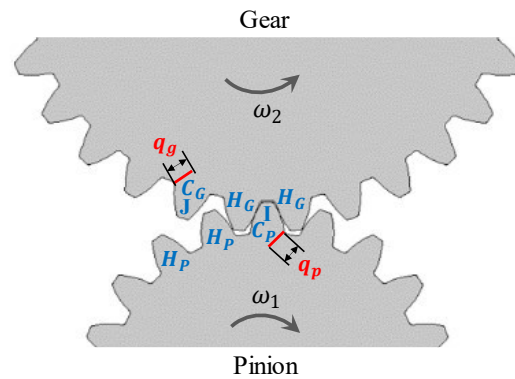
One tooth crack on the pinion and one tooth crack on the gear
